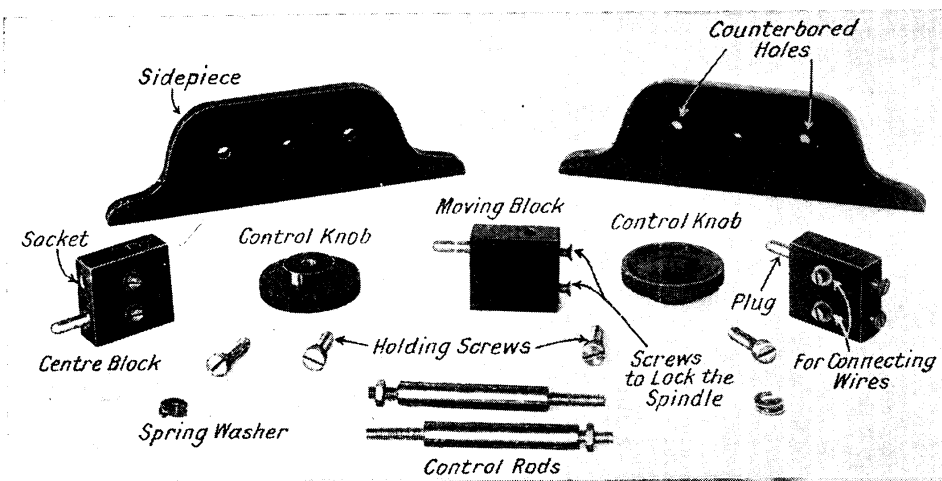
All the parts necessary for the construction of the three-coil holder laid out and named. These should be made and collected together before assembling, checking over in order to have at hand every part. Fig. 17. Centres for the coil-mounting holes are marked with a centre punch. Fig. 18. Side pieces are filed accurately to shape in this manner. They are held in the vice with leather protecting pieces. Fig. 19. Shapes of the side pieces are marked out on the ebonite panel and sawn out with a treadle fretsaw or a hack-saw
